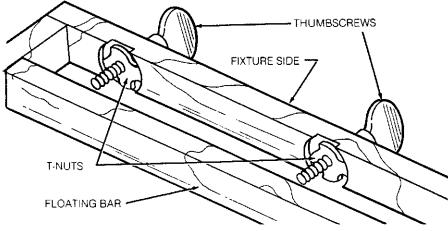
Use T-Nuts and thumbscrews to apply pressure against the floating bar which secures your workpiece in the clamp-in fixtures.
